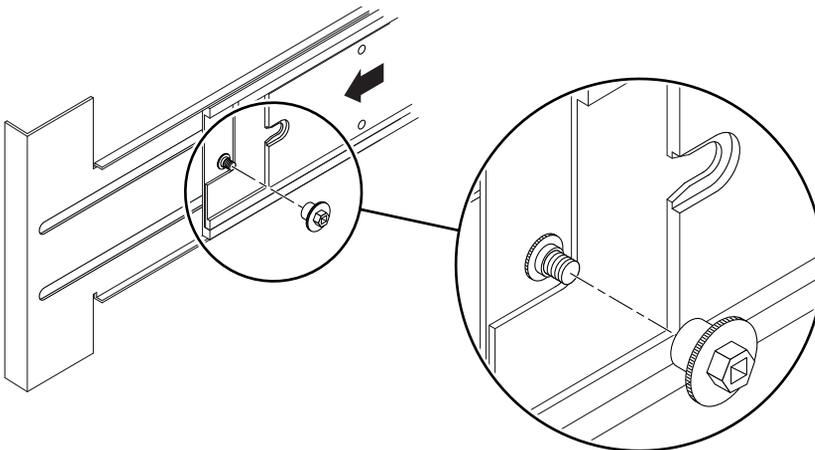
Inserting and Tightening the Slide Rail Lock Nuts
